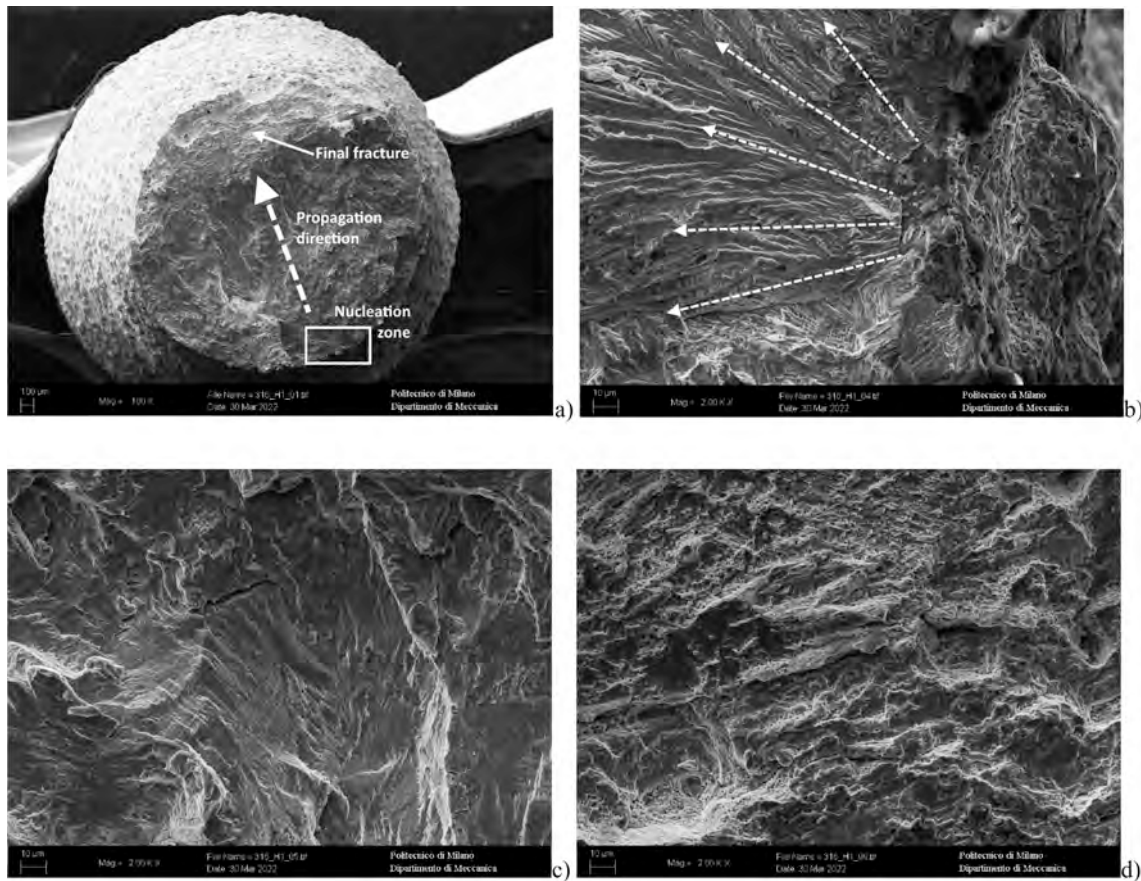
Fracture surface analysis of specimen HCF1 - (a) fracture surface, (b) nucleation zone, (c) propagation zone, (d) final fracture.
